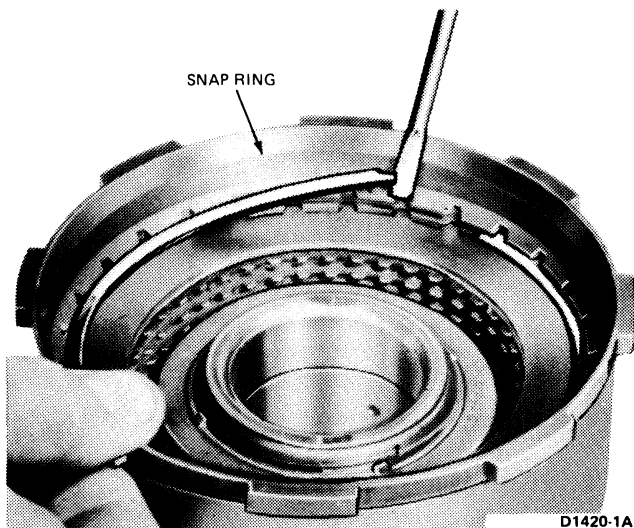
Removing or Installing Reverse-High Clutch Pressure Plate Snap Ring
